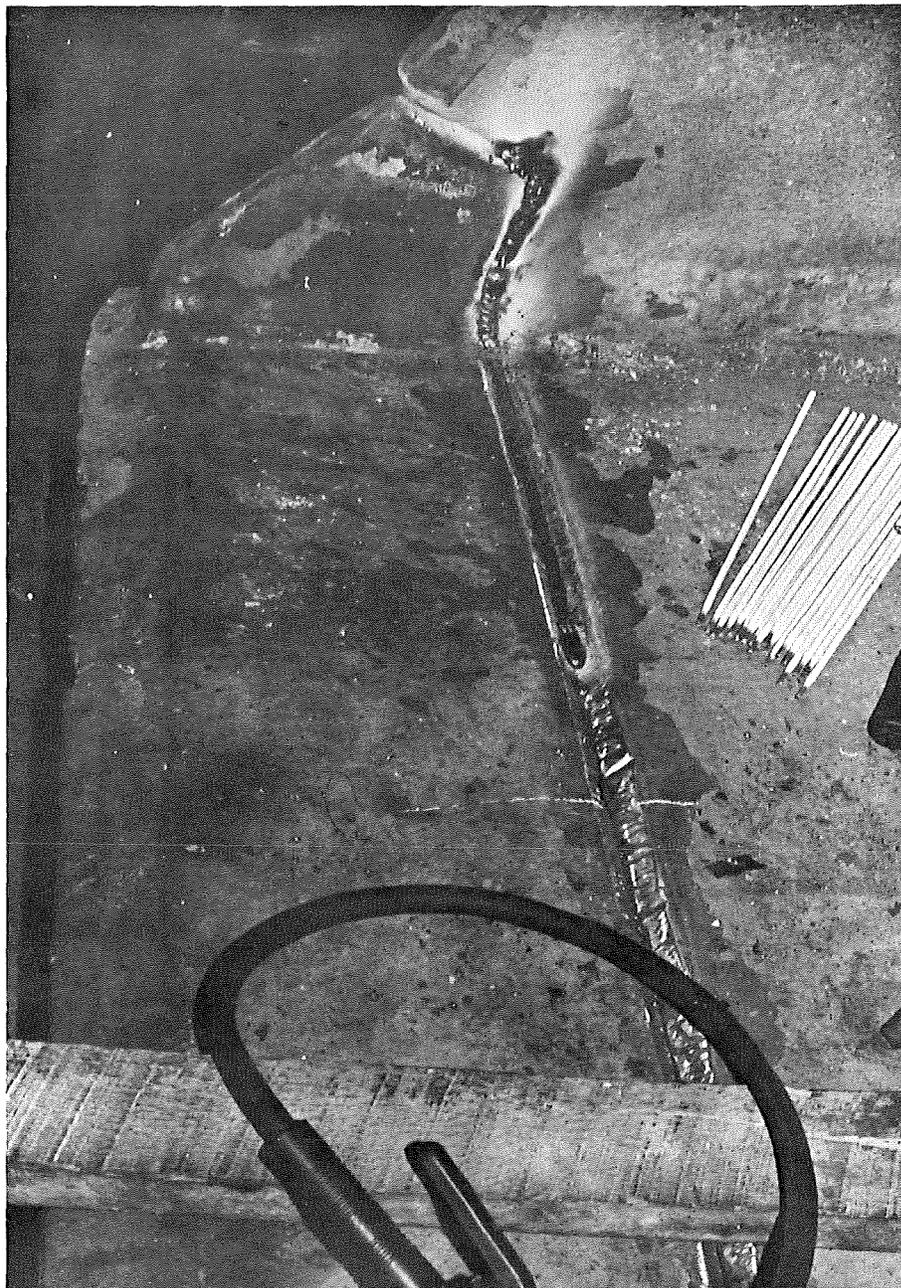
Shielded metal arc (SMA) welding of a shovel tip.
